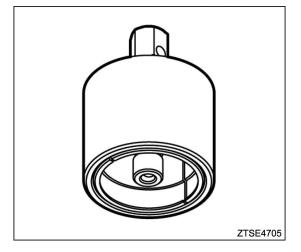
ZTSE4705 Front Wear Sleeve Remover
